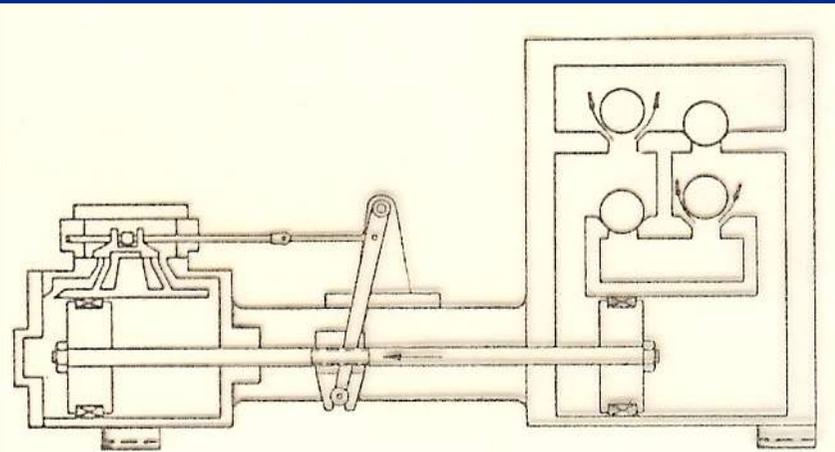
HORIZONTAL DOUBLE-ACTING STEAM PUMP
